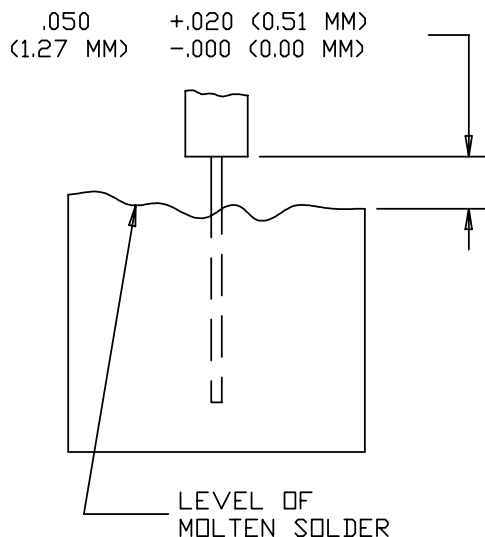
Example of axial wire-lead depth of immersion in molten solder.
